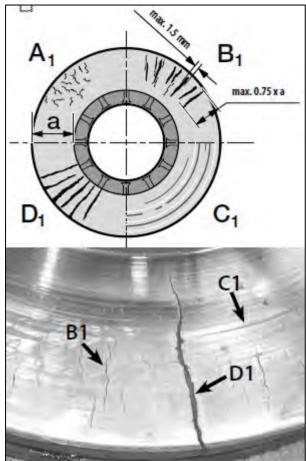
TOLERANCES AND EXAMPLES OF CRACKS AND GROOVES
